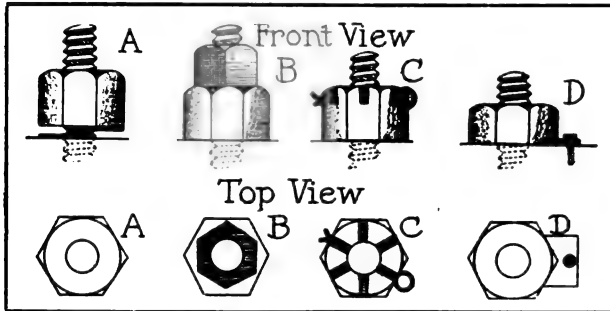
A, Spring Washer; B, Ordinary Use of Check Nut; C, Castellated Nut Secured by Pin; D, Nut Clamped to Prevent Turning.
